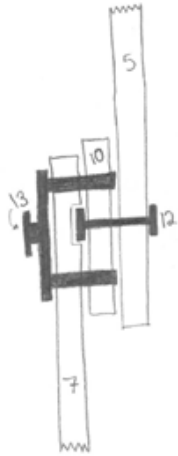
displays a close up of this mechanism. The ellipsoid wheel (part 9) moves with the vertical connection arm (part 4) from the metal plate about the upper axis of rotation (part 11). In the same manner, the circular wheel (part 10) moves with the metal leg insert (part 7) from the metal plate about the lower axis of rotation (part 12). On the side of the cam device towards her dorsal side, there is a cam band (part 14) that is connected to each of the wheels (part 15). When the angle between her torso and lower body starts to decrease below 180°, there will be tension in the cam band, creating resistance. The cam band will be made of an elastic material so that the patient is able to bend her upper body forward or bend her legs at the hip, but there will be some degree of kickback to bring her back to an upright position.
